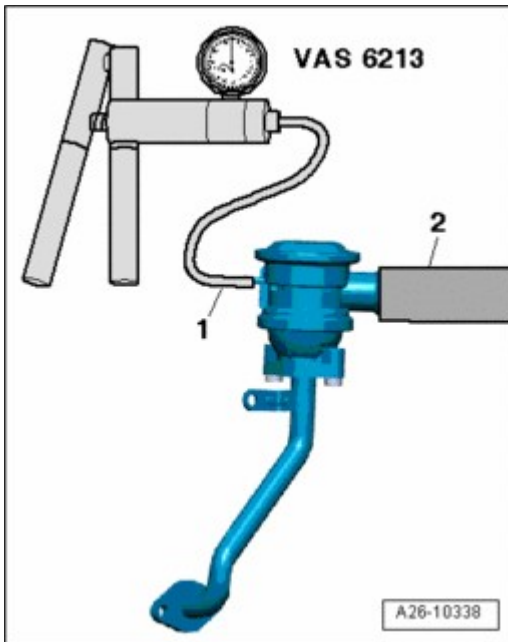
Connecting Hand Vacuum Pump VAS 6213 To Vacuum Connection On Secondary Air Injection Combi-Valve
